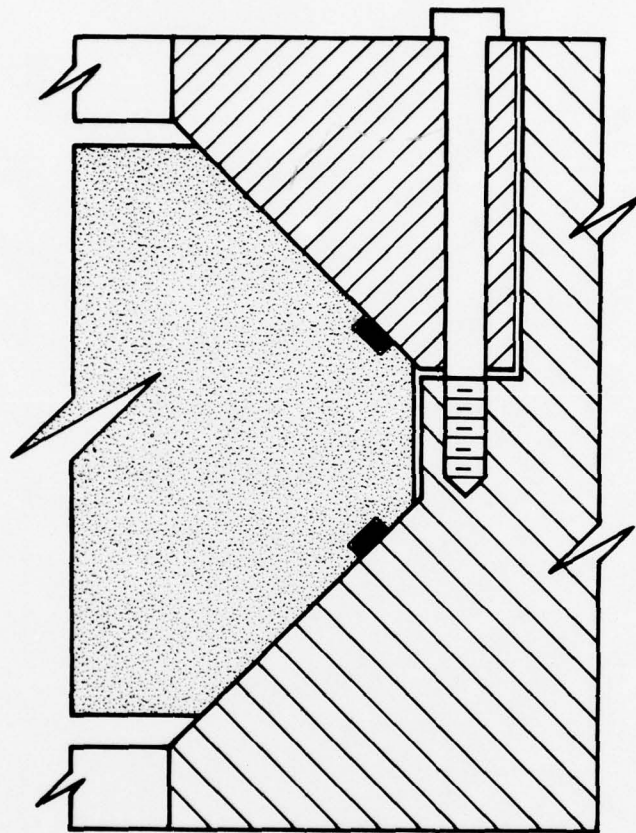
Sealing arrangement for twin-beveled discs using axially compressed O-rings located in the grooves on the bearing surfaces of the window. This is not a recommended design, as the O-ring grooves in the bearing surfaces significantly decrease the fatigue life of the window.
